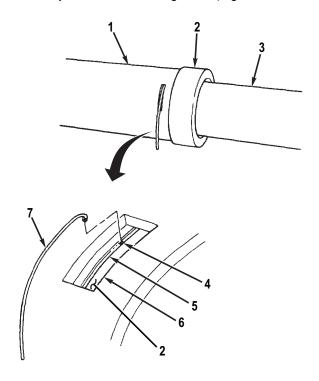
Hydraulic Positioning Cylinder (without Side Lift Kit) Assembly.
